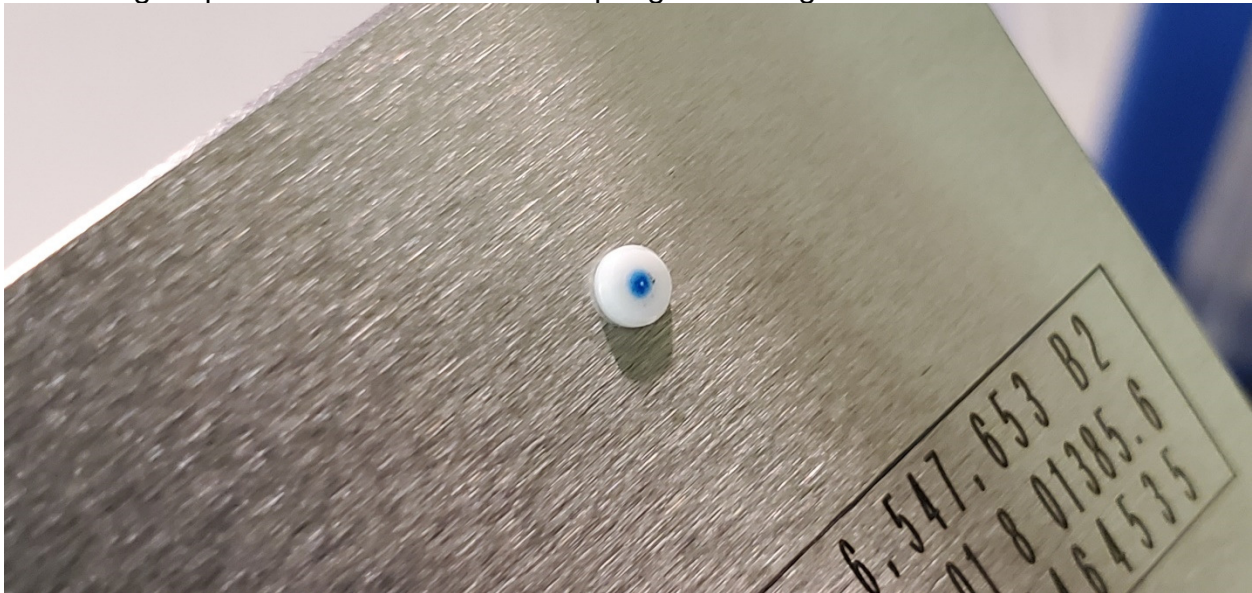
Fiber Tip Protruding through Bottom of Polishing Plate
